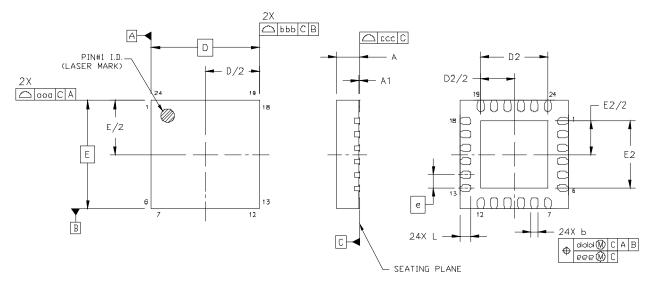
24-Lead Quad Flat No-Lead (QFN)
